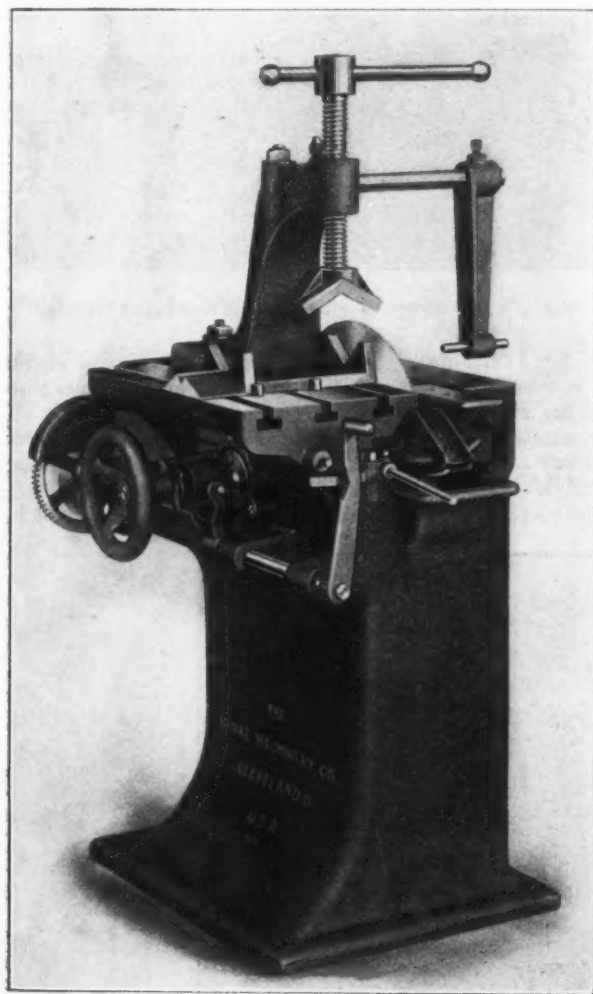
The New Cold Saw Built by the Burke Machinery Company, Cleveland, Ohio.
